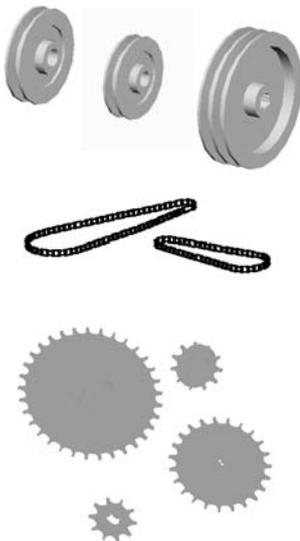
Pulleys, chain and sprocket of self-propelled reaper.
